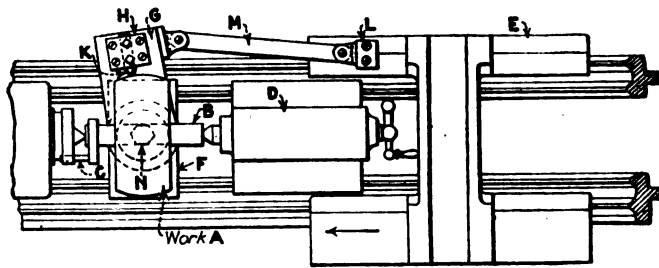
SPHERICAL TURNING ATTACHMENT FOR ENGINE LATHE
